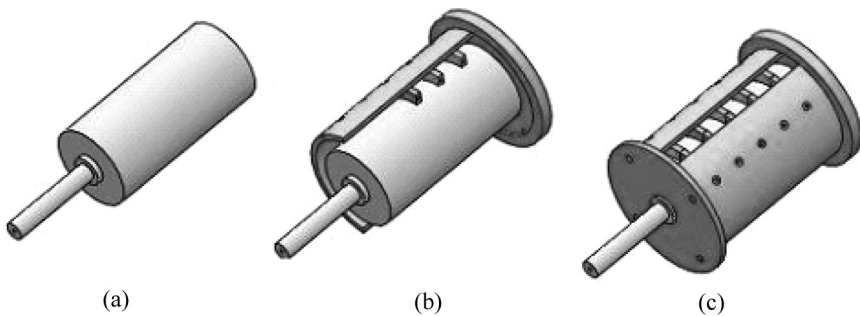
Schematic showing molding apparatus used for circular peel: (a) hollow mandrel, (b) sectional view to reveal partitions, and (c) complete assembly.
